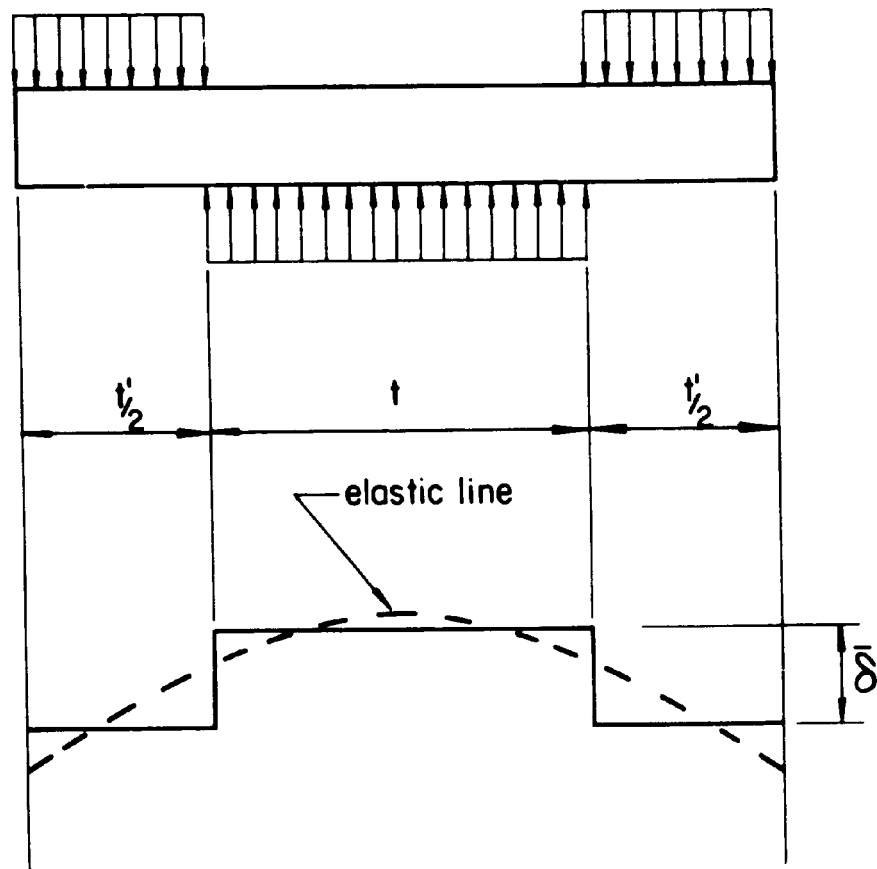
Assumed Loading on Bolt or Rivet (Ref. 14)
